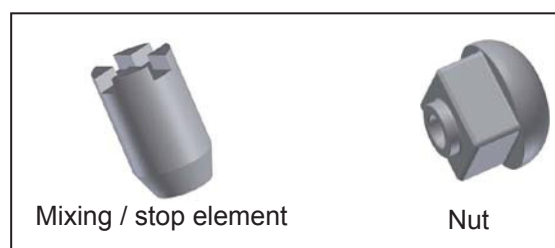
Mixing/stop element and nut belonging to roofex [43]
